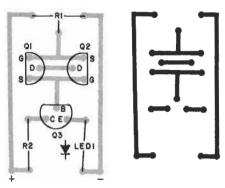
Etching and drilling guide (right) with component layout (left) can be used or a perforated board will do.
